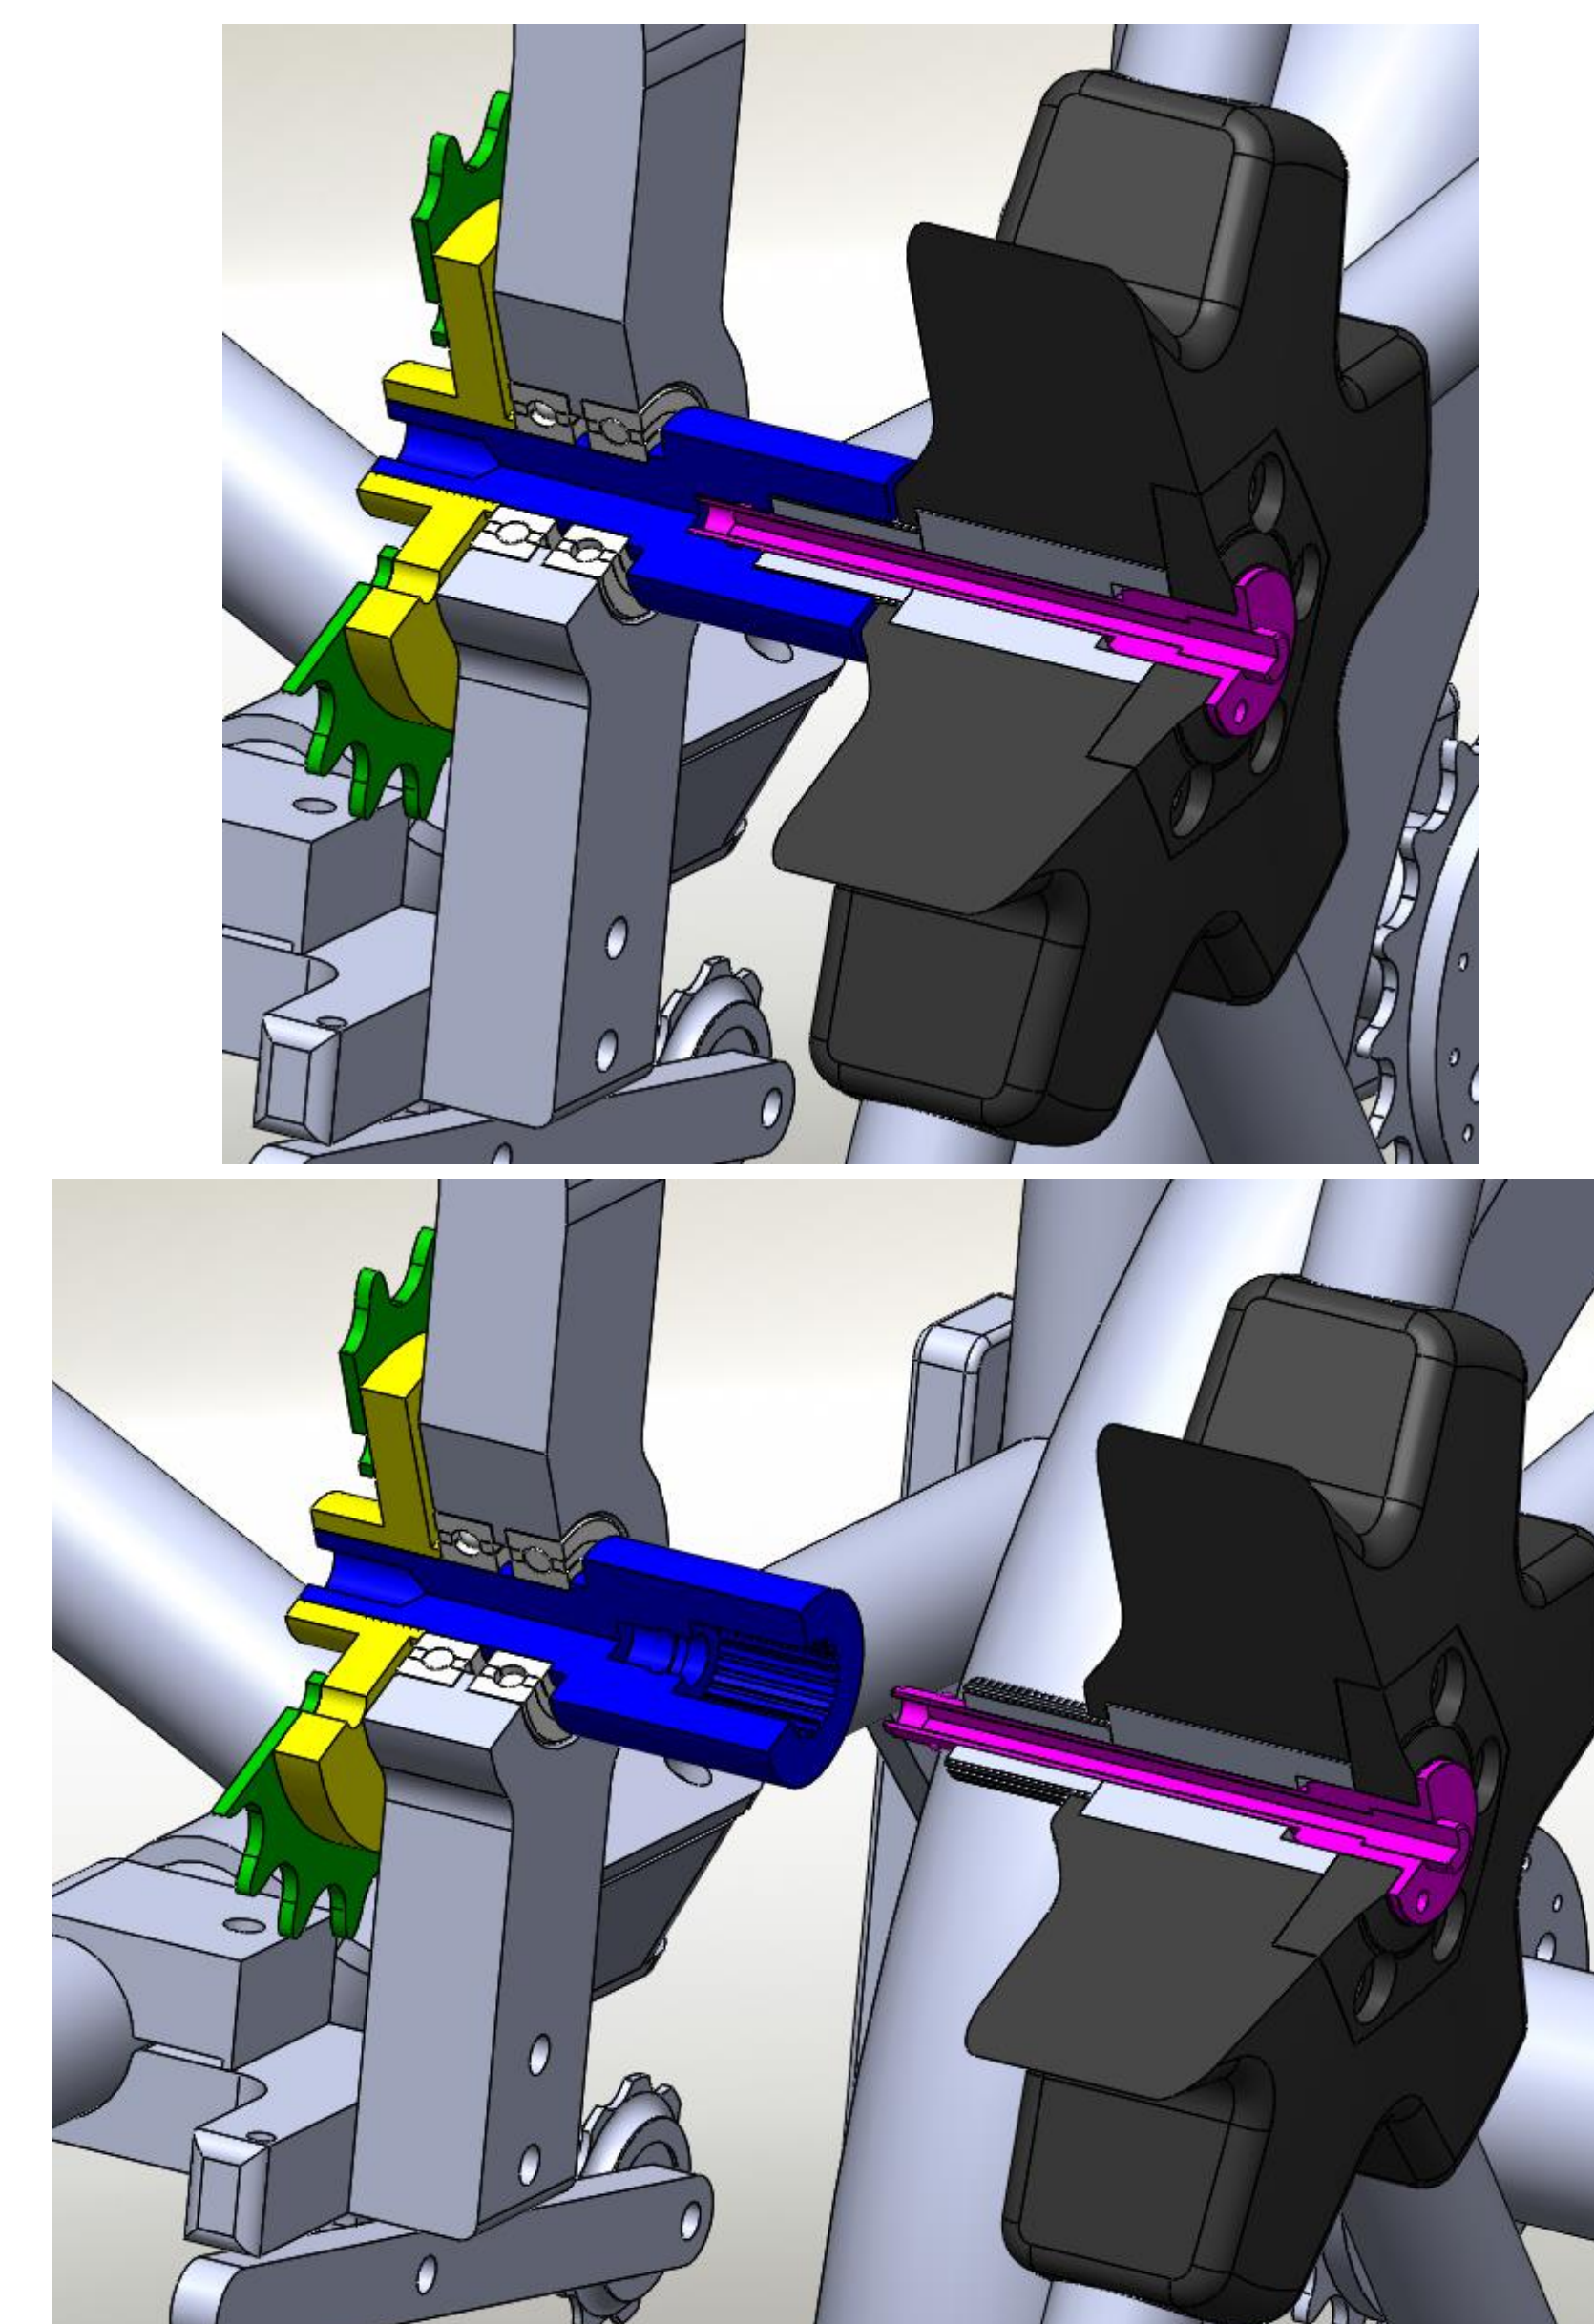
Hand rim mounting system in engaged (top) and disengaged (bottom) positions.
